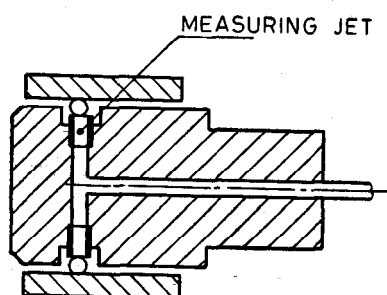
MECHANICAL CONTACT AIR PLUG GAUGE
